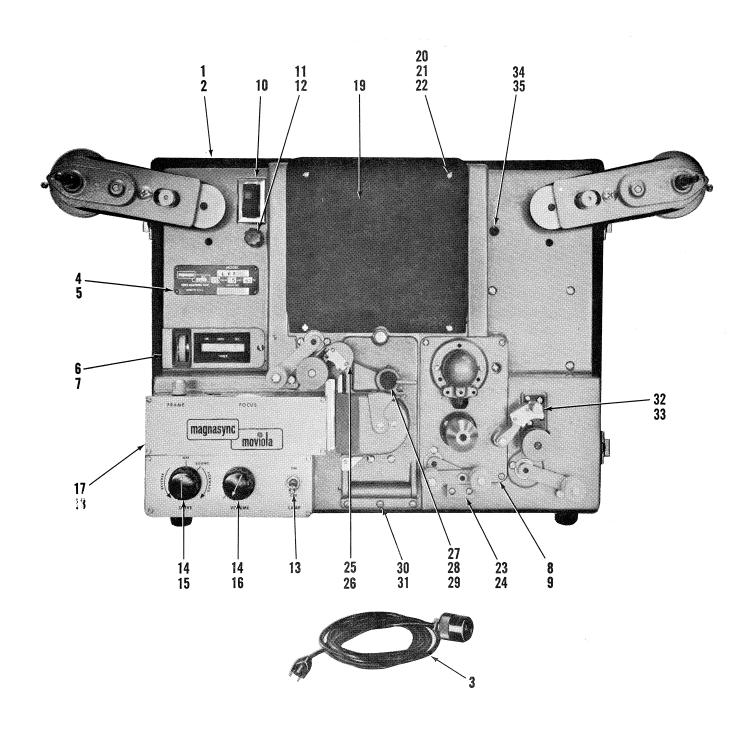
Library Reader Assembly (Sheet 1 of 3)
